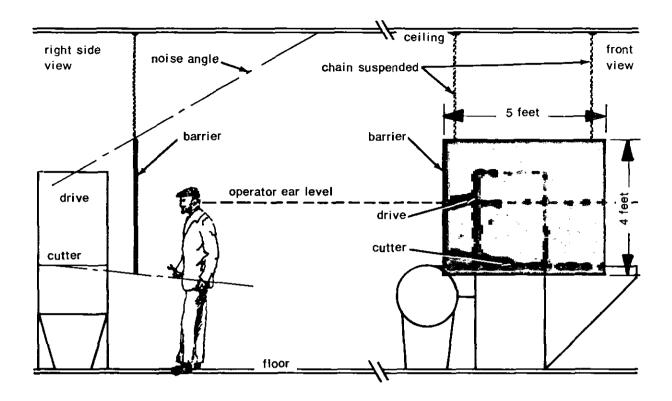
Barrier wall for straight-and-cut machine.
